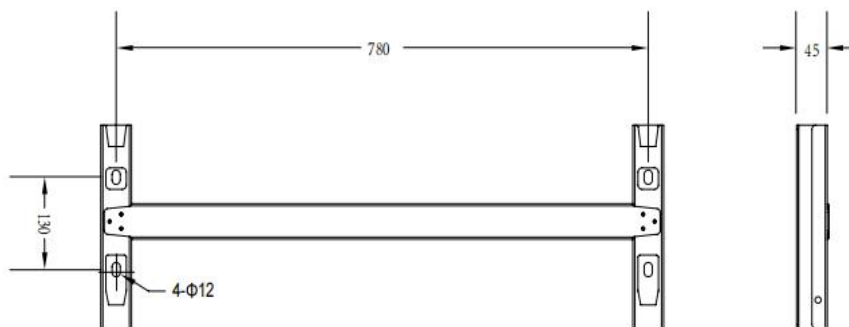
Back-mounted installation dimensions (mm)
